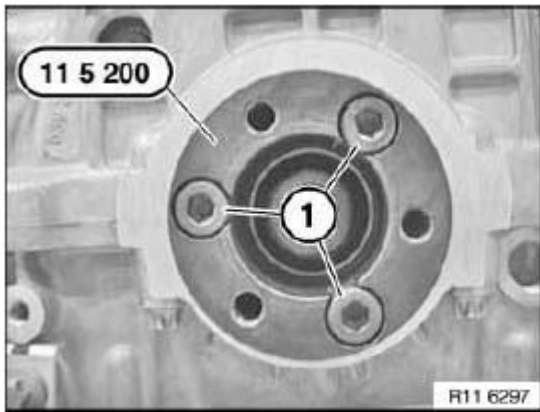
Identifying Special Tool (11 5 200) And Mounting Screws
